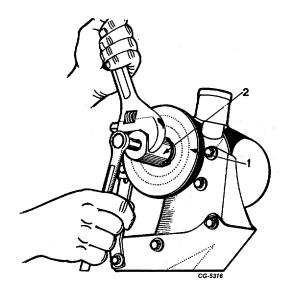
Using SE-2420 Puller to Remove Power Steering Pump Pulley
